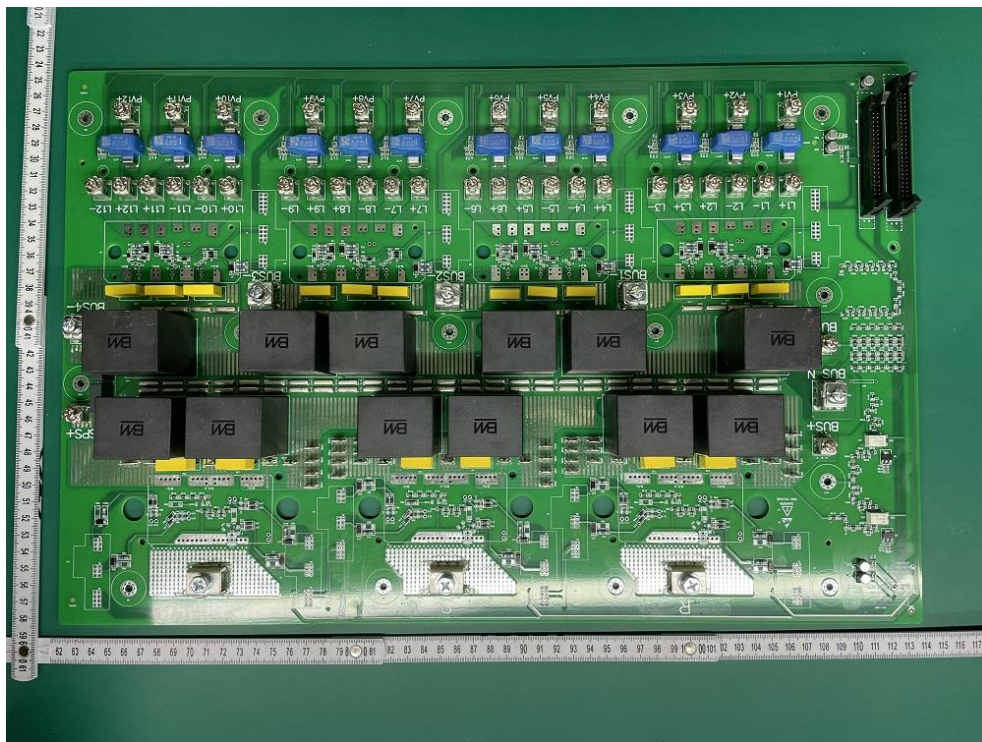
Front view of Main power board for C6-70K-T12-LV-40
